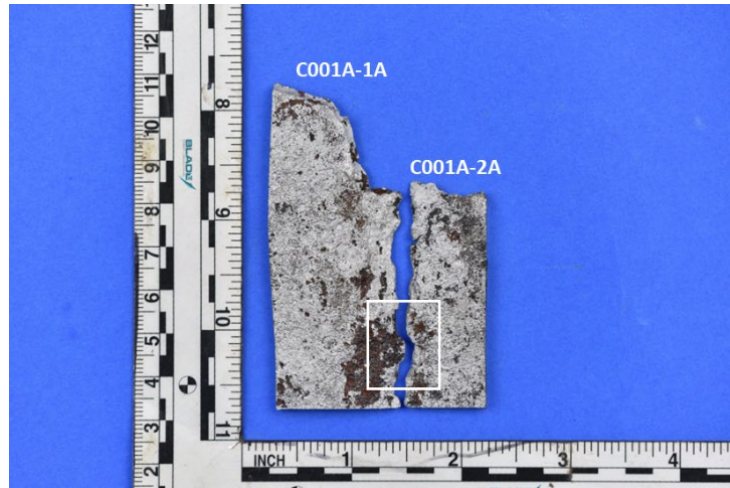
Region Used in Mating C001A-1A and C001A-2A Fracture Surfaces
